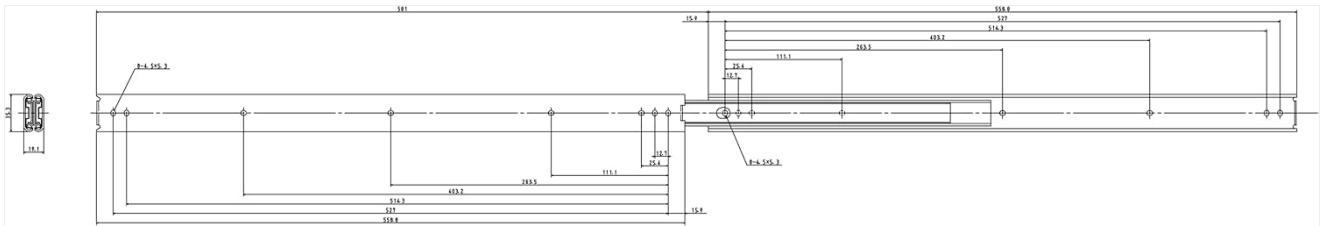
Technical drawing of the Accuride Double Slide Rail, showing detailed dimensions and mounting hole locations. Refer to this diagram for precise installation measurements.
